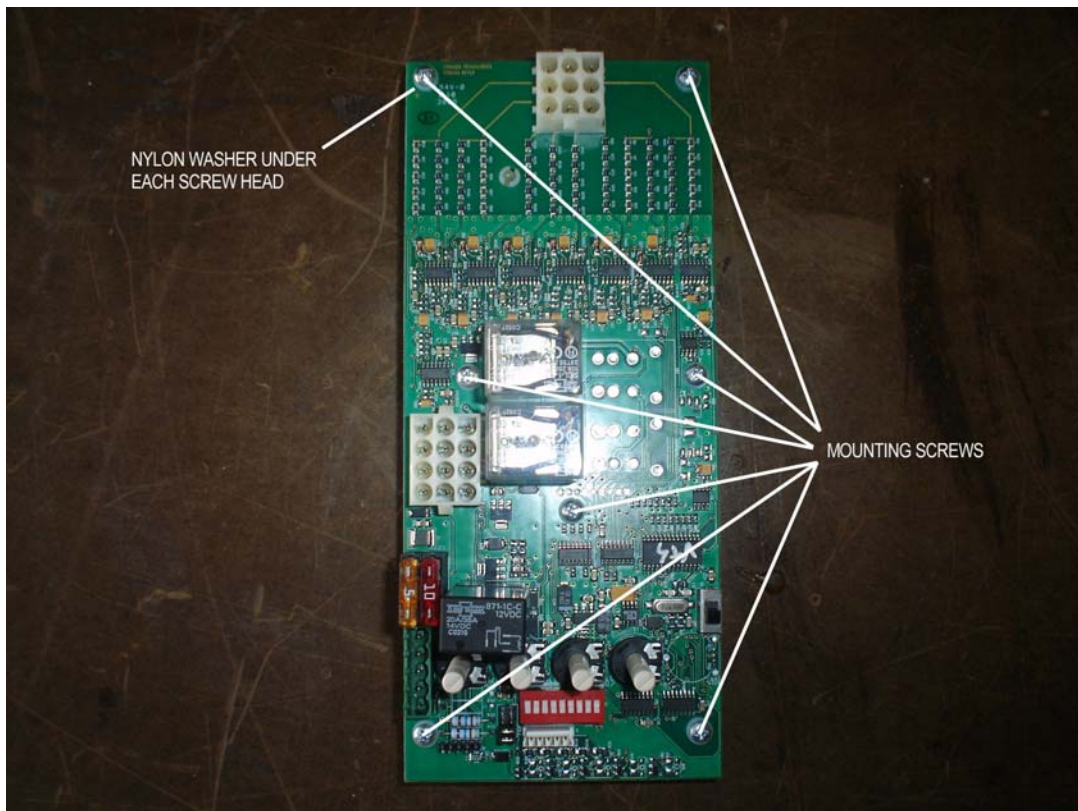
CONTROL BOARD MOUNTING SCREW LOCATIONS
